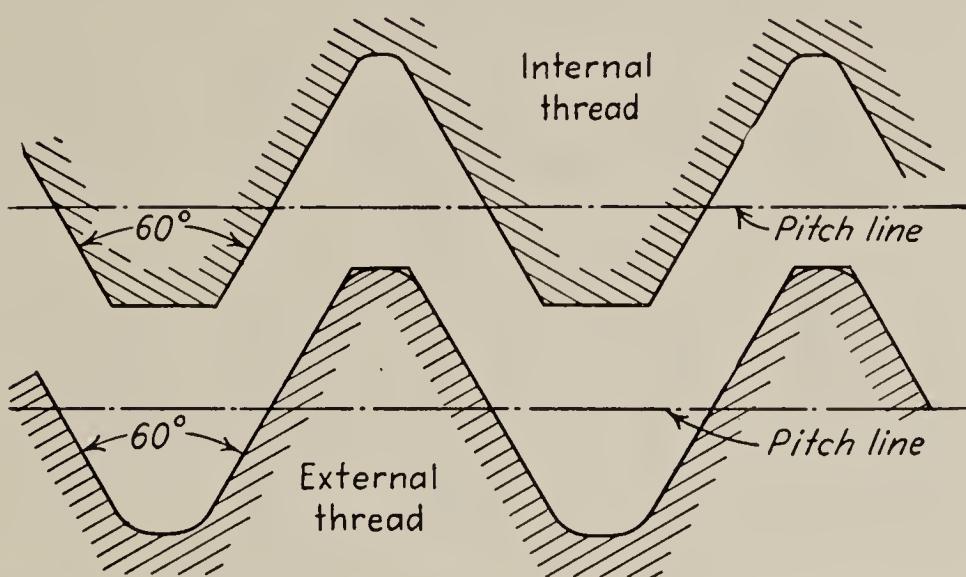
Unified and American screw-thread form. Threads shown separated for clarity. Crests on external threads may be rounded or flat.
